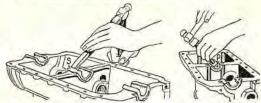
(left). Cutting lugs or sprues (S) from sides of bearings. Fig. 19 (right). Peening the babbitted bearings.
